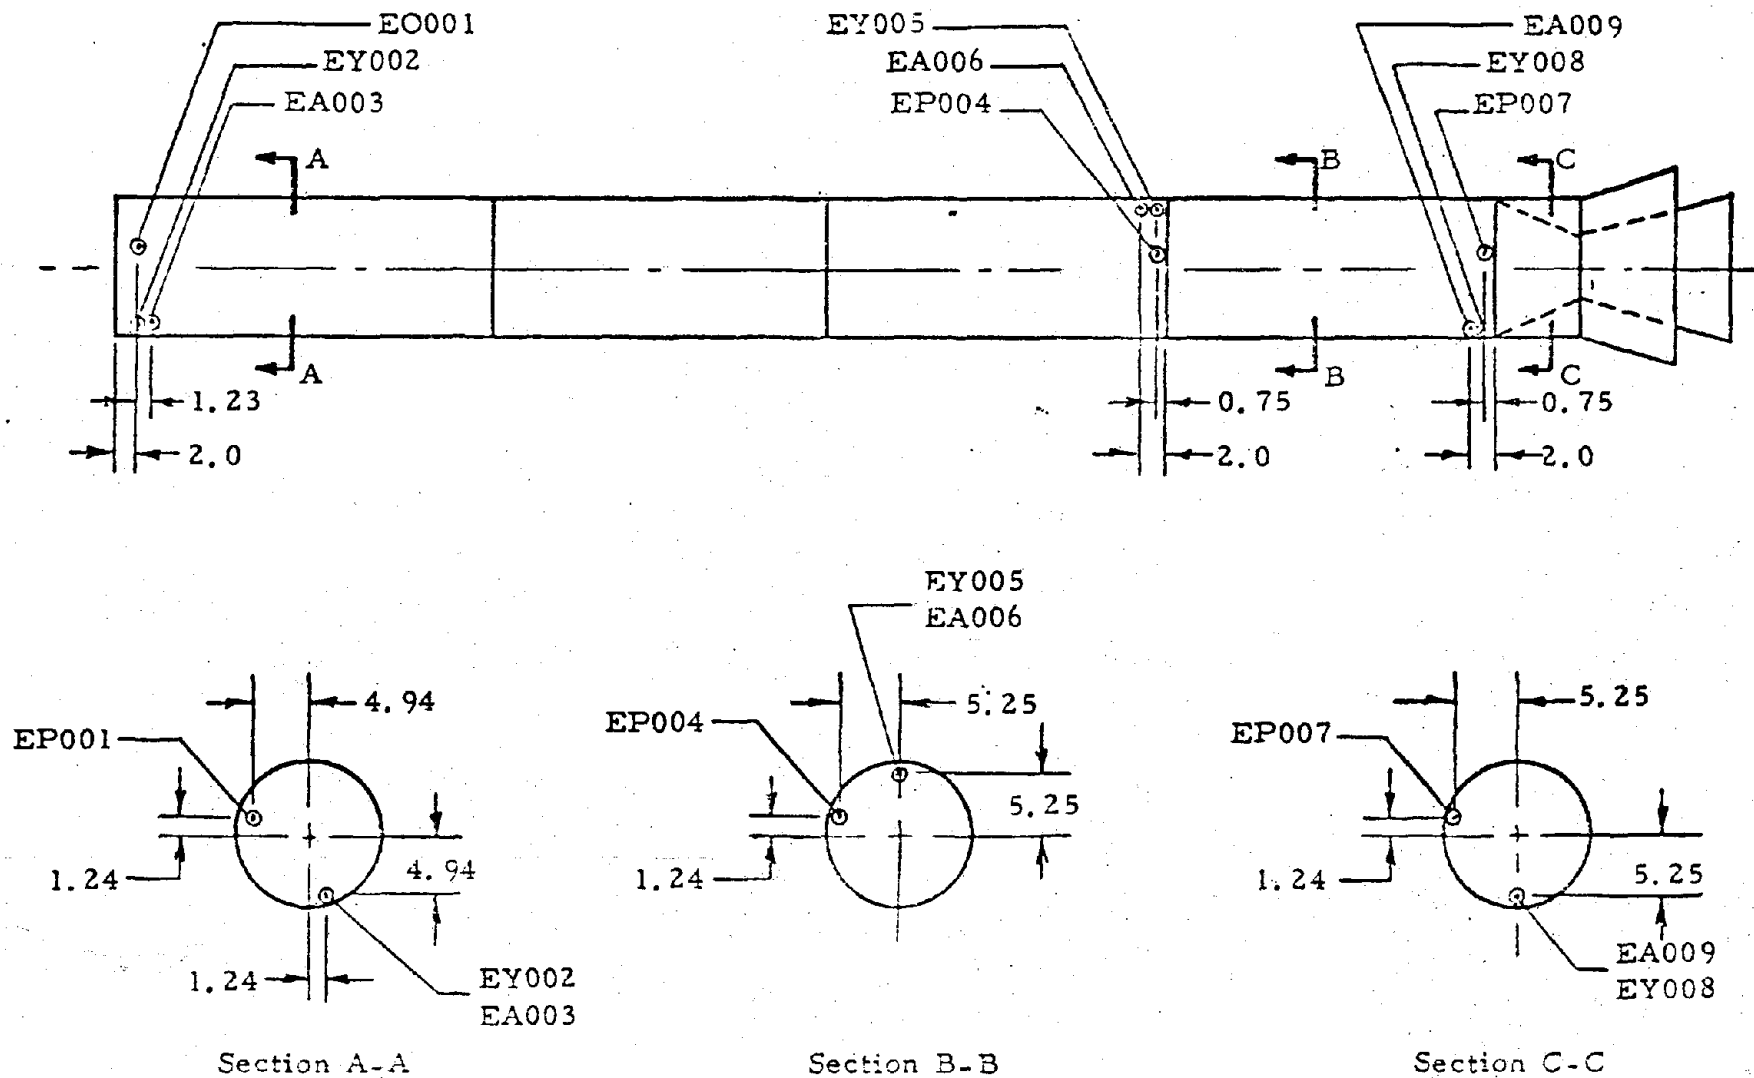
ACCELEROMETER LOCATIONS, 4-11-73 CONFIGURATION
